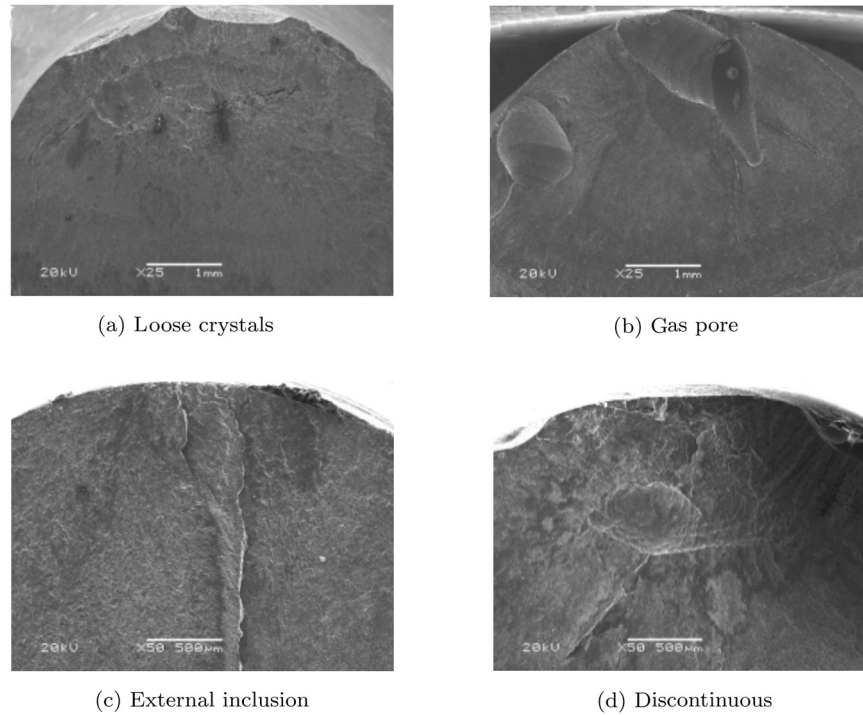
The micrographs of the fracture surfaces of welded joints.
